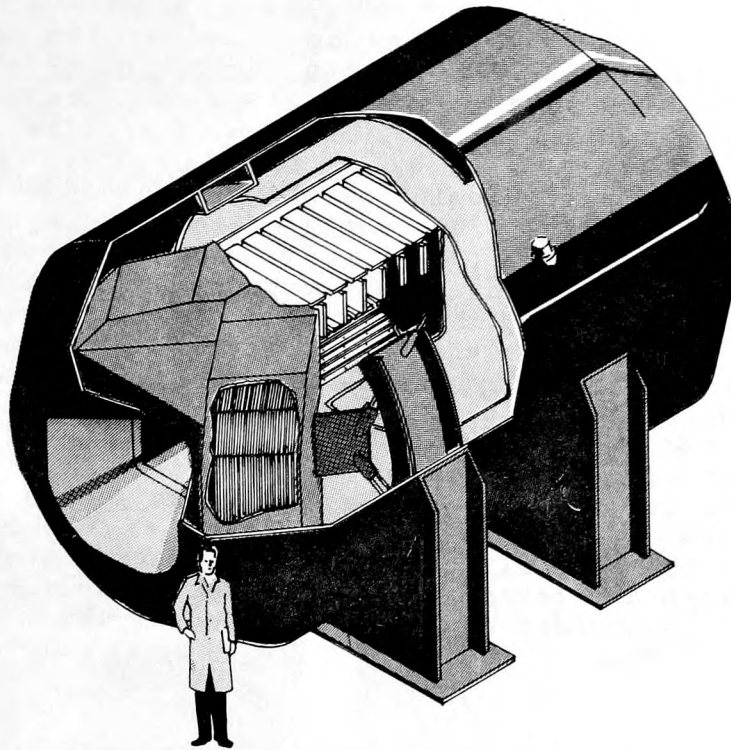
Cutaway view of the rectangular saddle CDIF/SM assembly.
